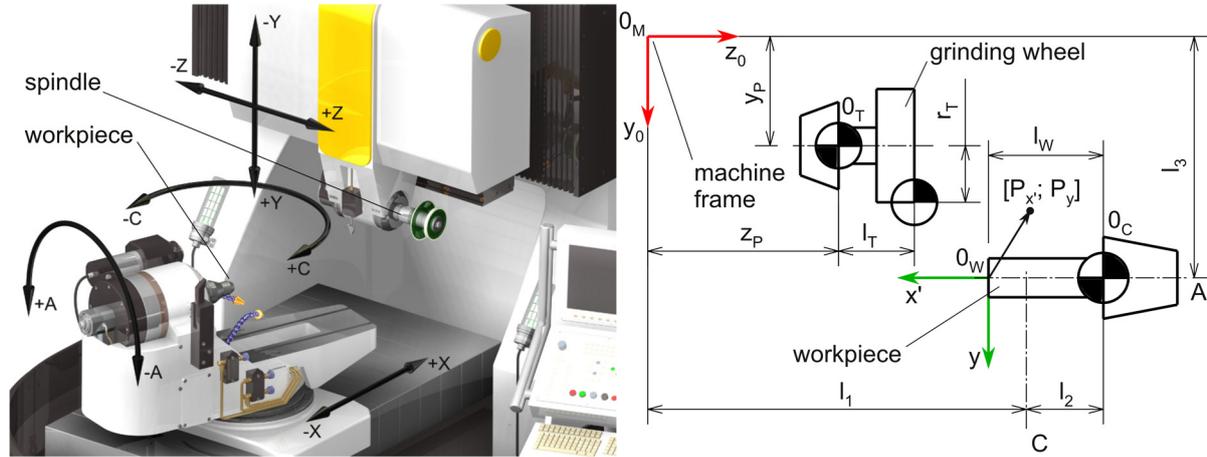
Driven axes of Walter Helitronic (left), dimensions of workspace (right)
